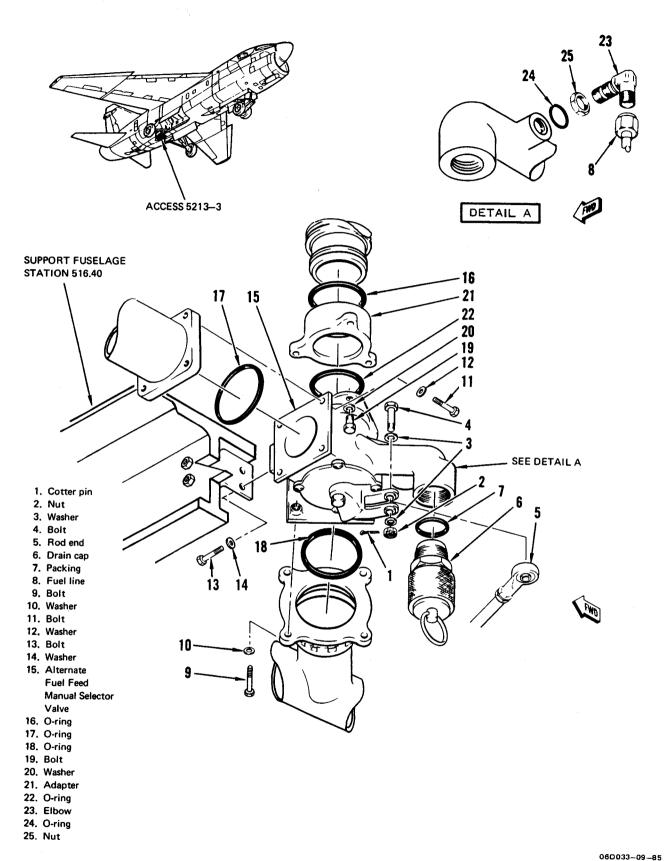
Removal and Installation; Alternate Fuel Feed Manual Selector Valve
